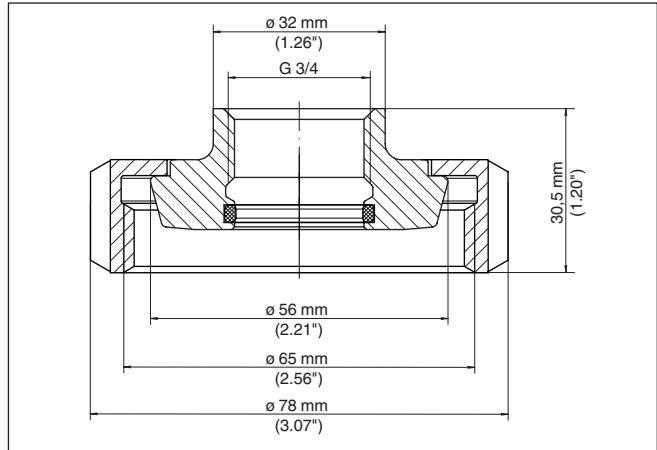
Dimensions of threaded adapter G $\frac{3}{4}$ (DIN 3852-X) on slotted nut DN 40 (DIN 11851) PN 16
